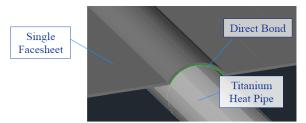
Single-facesheet radiator with direct bonding of the facesheet to the heat pipes [4]
